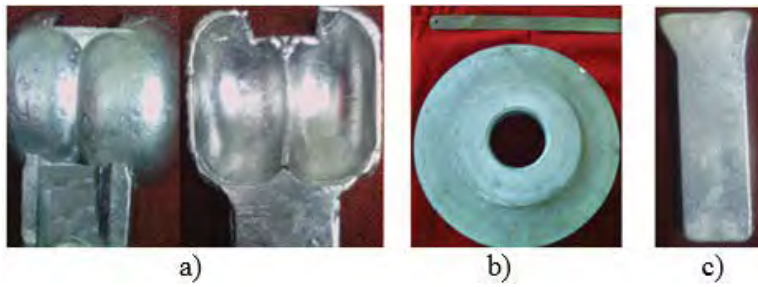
Castings from different casting techniques: a) Pelton Turbine bucket cast by centrifugal casting method; b) Cylindrical from circular casting mould cast by centrifugal casting method; c) Castings made by gravity casting method.
